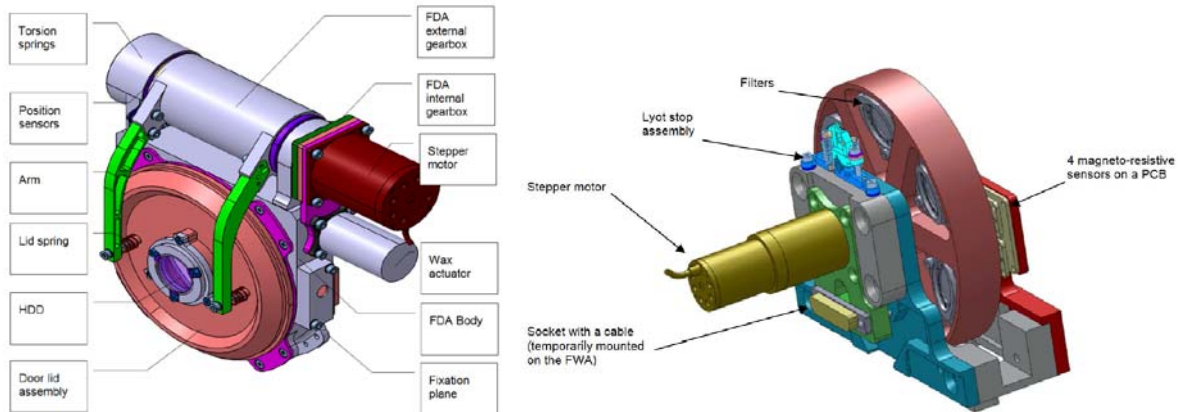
Front Door Assembly (left) and Filter Wheel Assembly (right)
